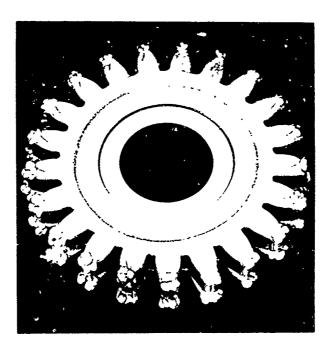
Gear plated in adjustable slotted mask (0.01-in. plate thickness).
